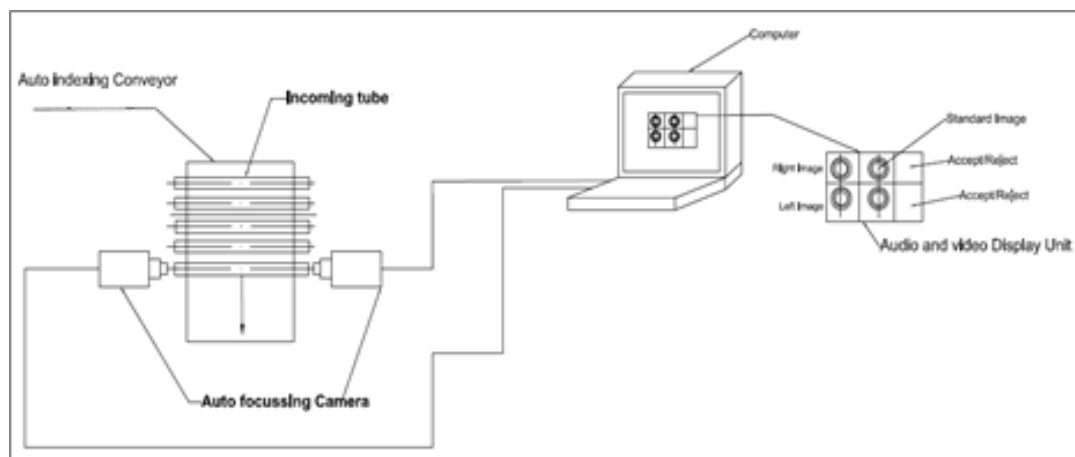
Overall concept of the Automatic tube inspection system
